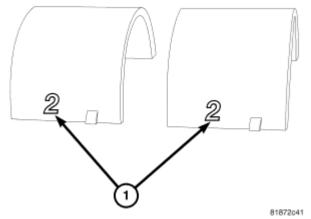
CAM BEARING IDENTIFICATION Courtesy of CHRYSLER LLC
